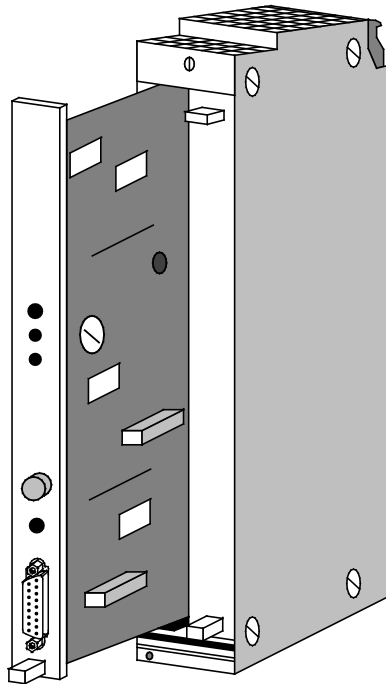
Installation of a Printed Circuit Board into an Adapter Casing (6ES5 491-0LB11)
